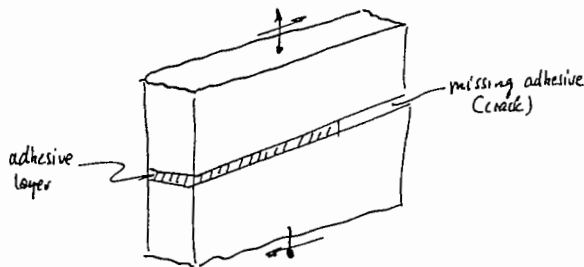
Standard test geometry used for thickness-averaged fracture mechanics.
